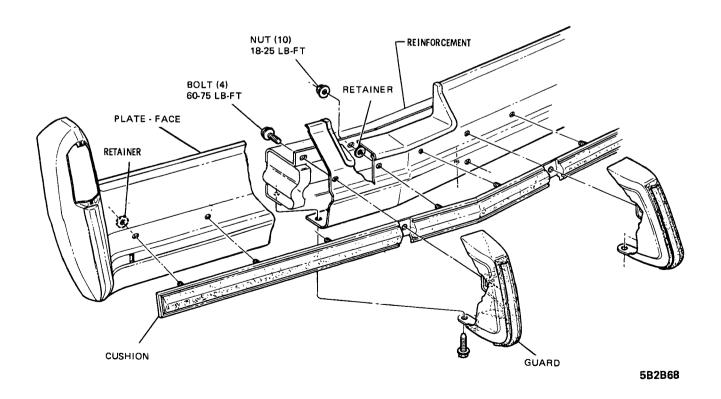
B-68 C Series Rear Bumper Cushions and Guards
